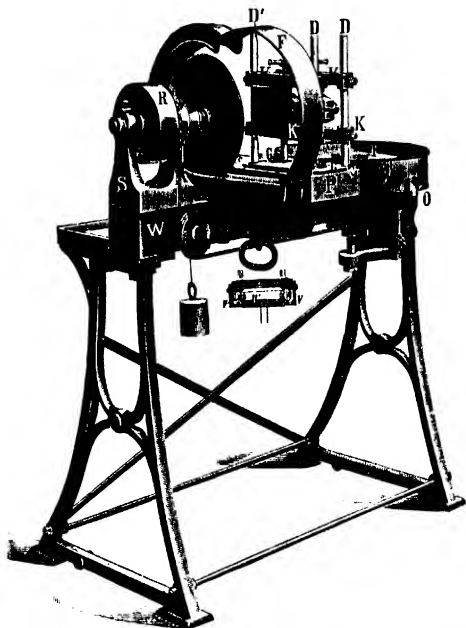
Steeg & Reuter's Motor-driven Crystal Cutting and Grinding Machine.
